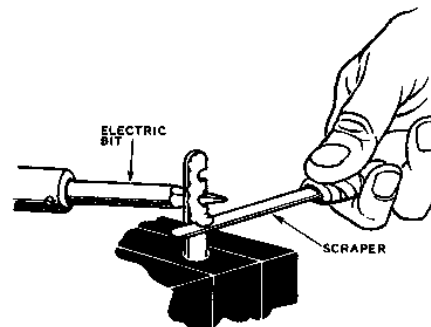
CLEANING A VERTICAL TAG WITH SOLDERING TOOL AND SCRAPER.
